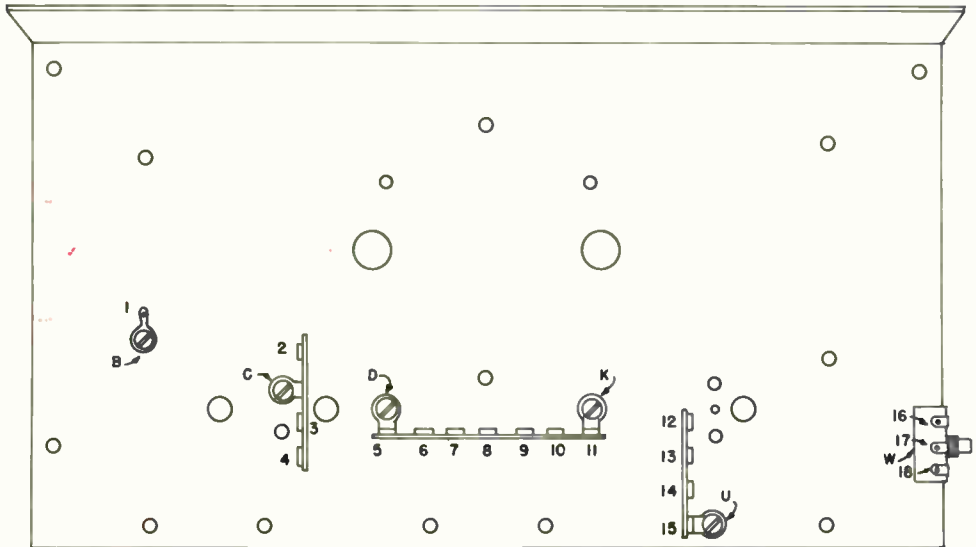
Parts mounted on the chassis and the terminal identification number.
